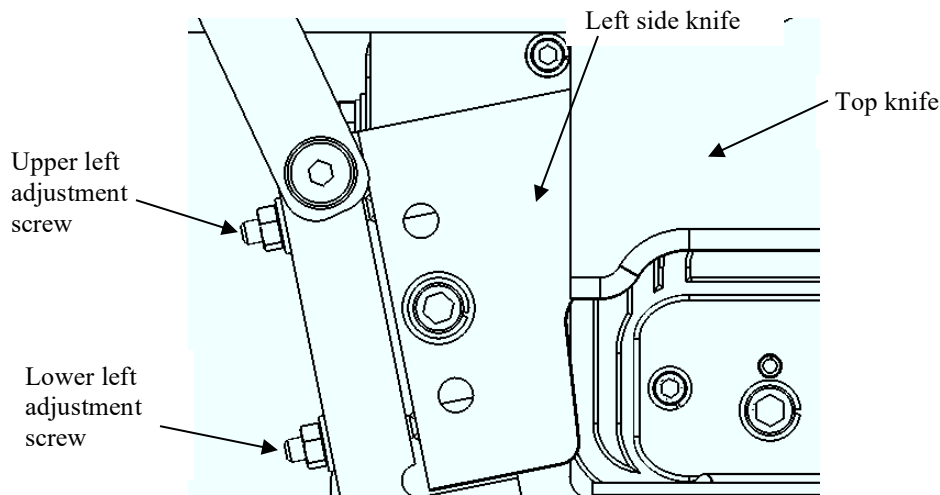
This figure shows the location of the two adjustment screws for the left side knife.
